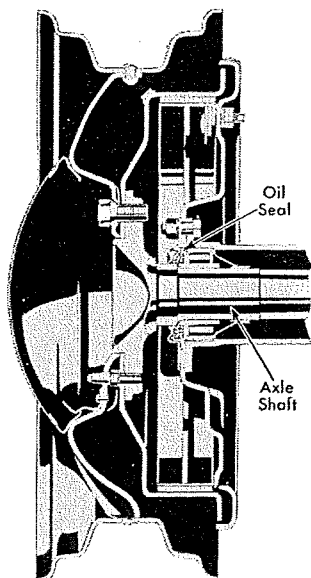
Group Nos. 203 and 206 Axle Shaft
